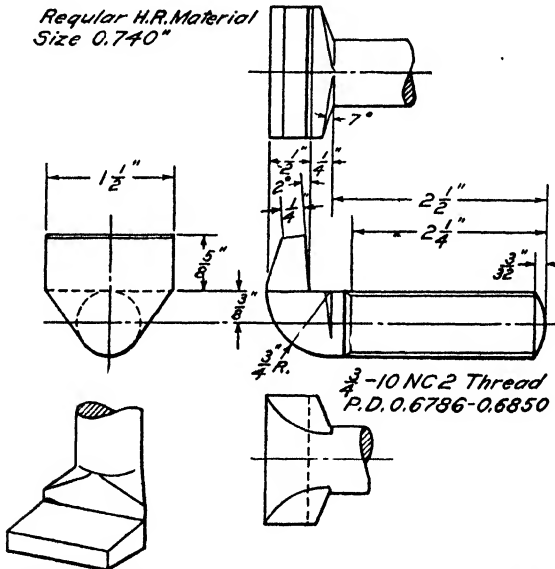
Heads which are L shaped (offset to one side only) can be produced by hot heading, as in this instance.
